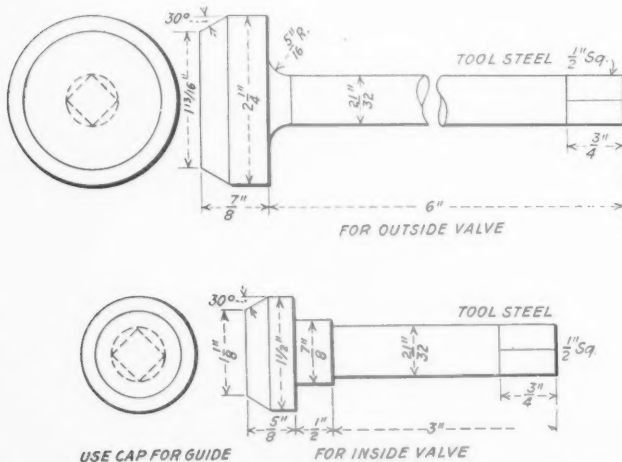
Non-Lifting Injector Throttle Valve Reseating Tool
